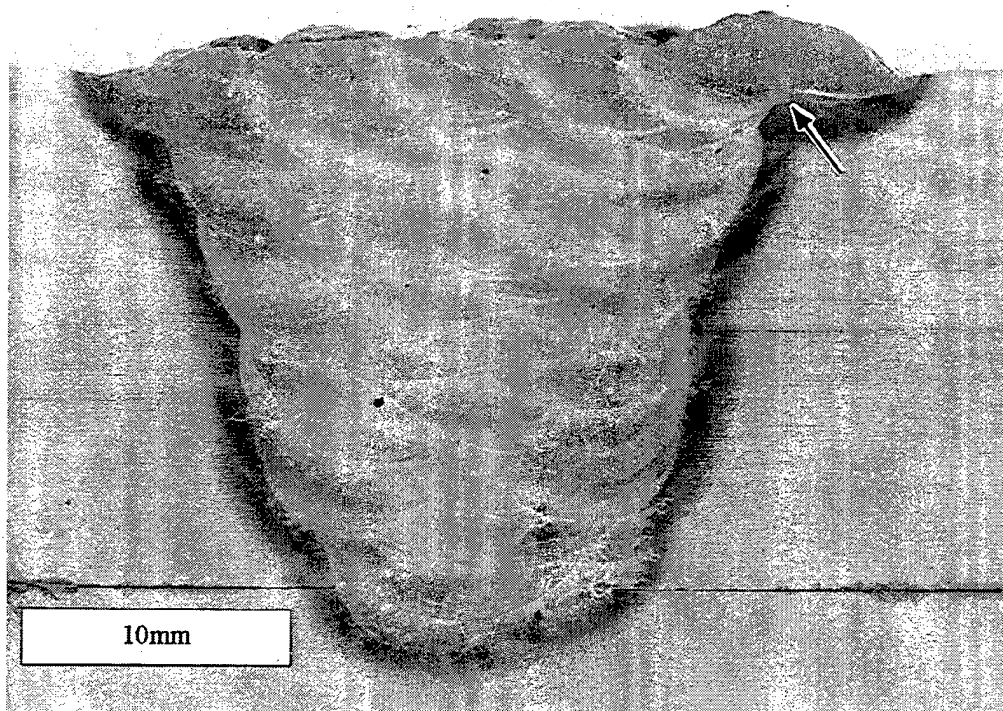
Macro photograph of UWW12 weld sample – Underbead cracking is indicated by an arrow
